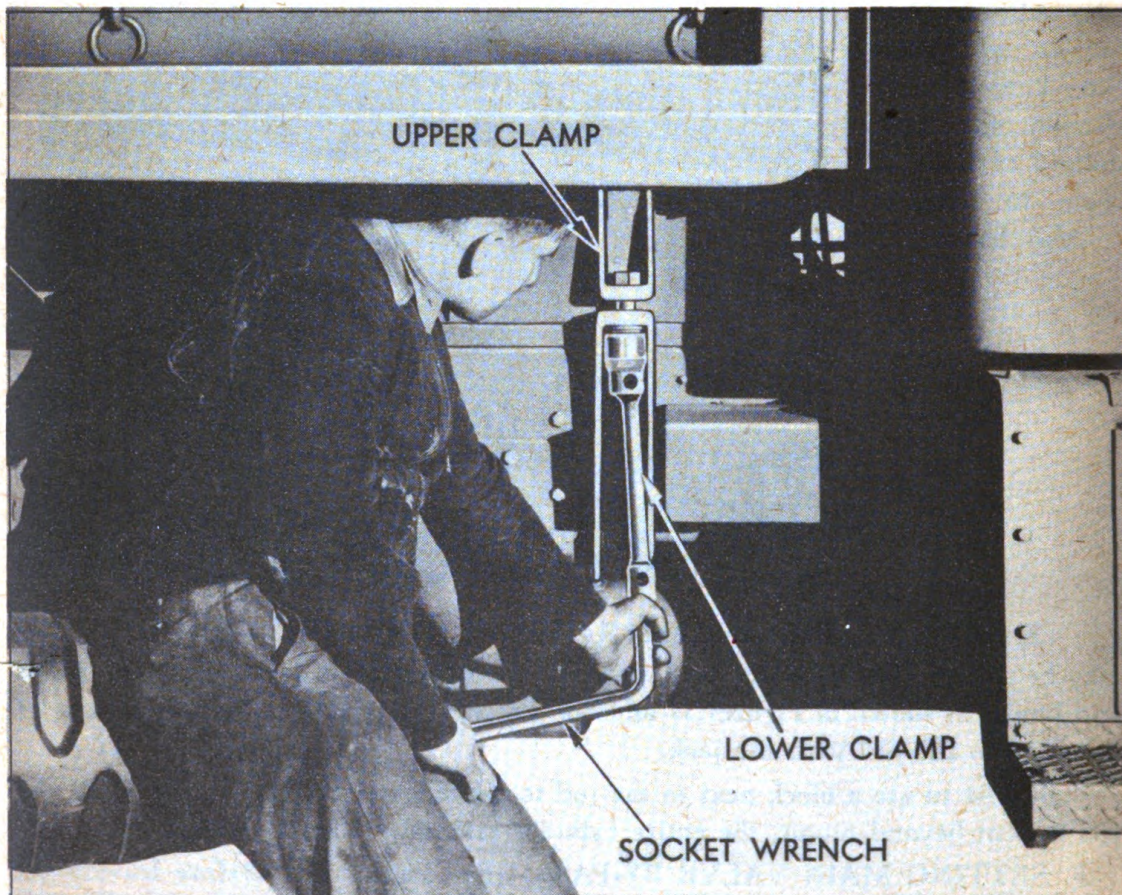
Tightening A Hold-Down Clamp Securing Body to Truck
